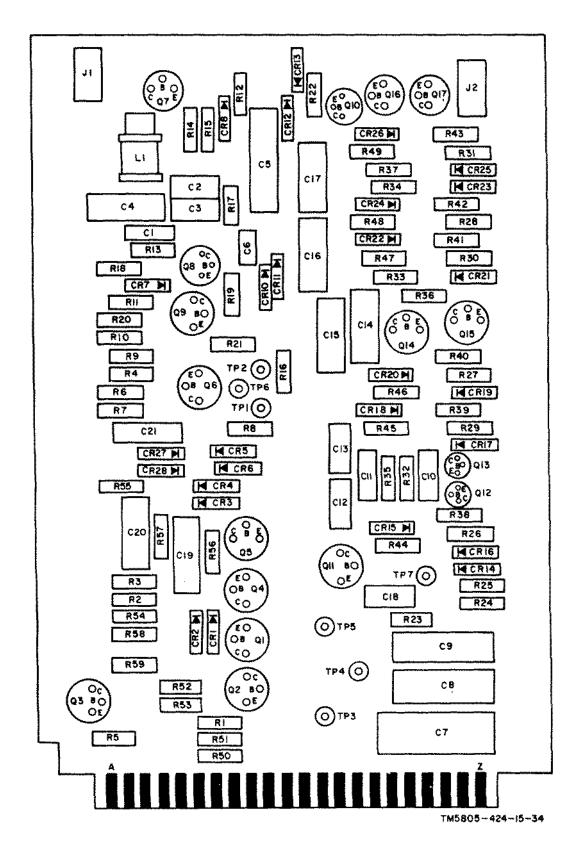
Printed-circuit cord assembly A1 (PC 80034090), component location diagram.
